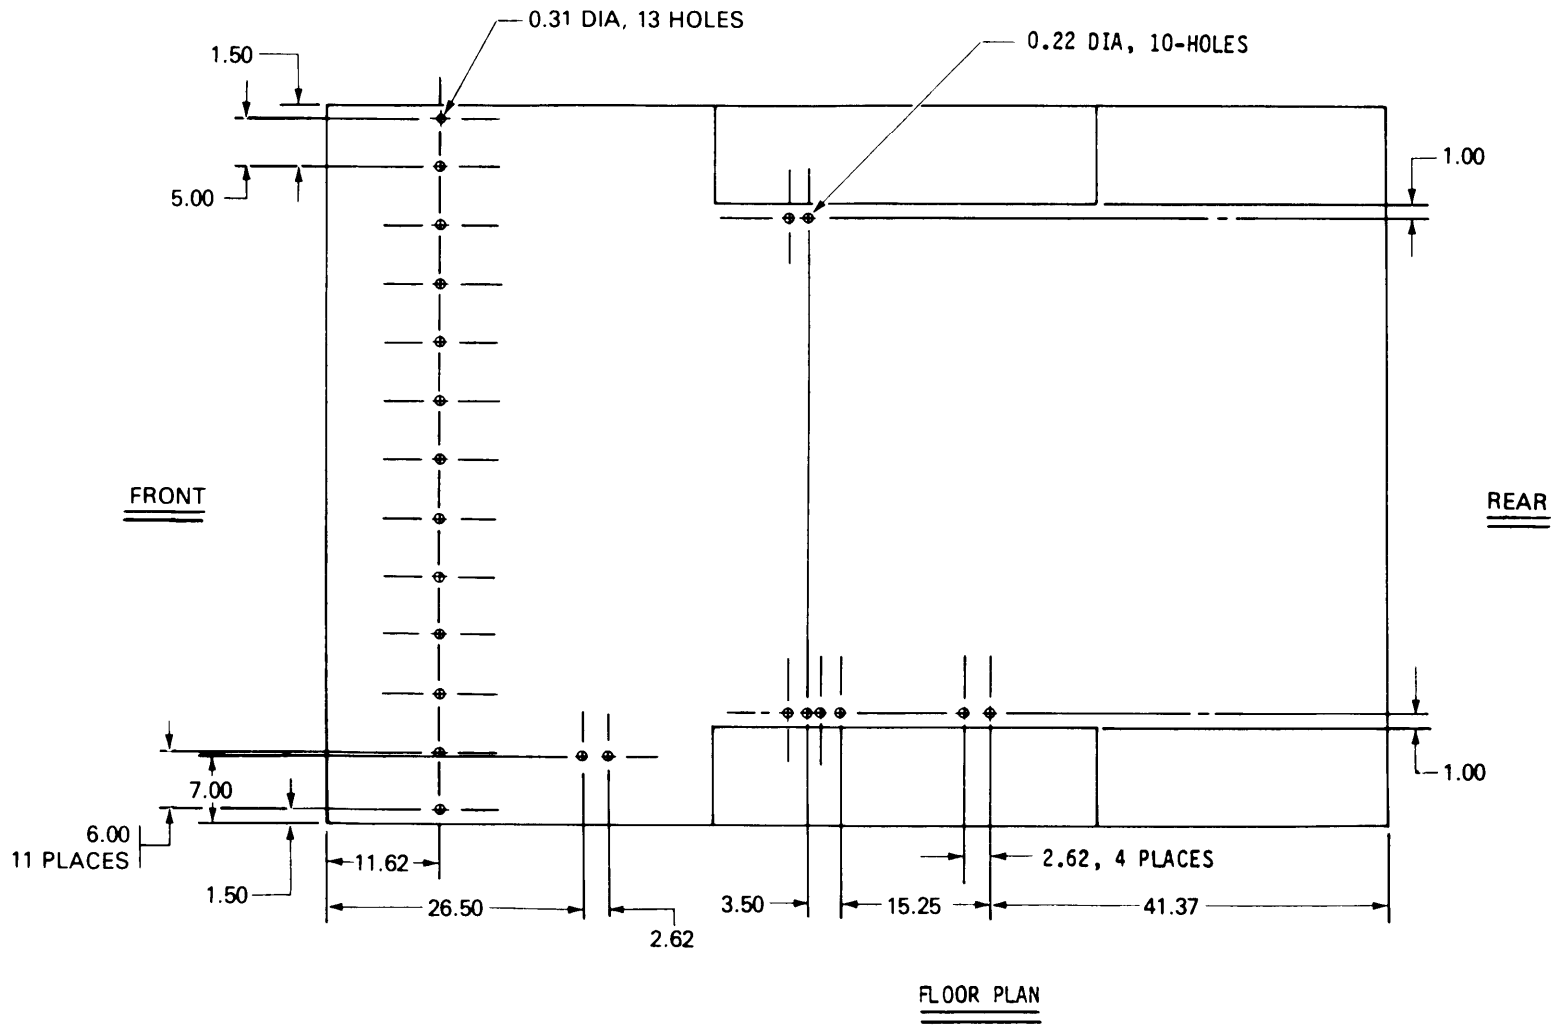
Hole Dimensions for 74-in. Support Angle and Strap Loops, Unit 2, M105A2, Floor Plan.
